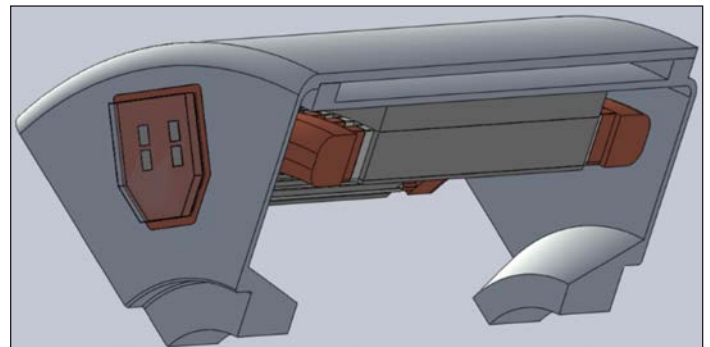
Axially integrated CAD model based on the BMW i3 traction motor and SiC power devices: one-phase power module with one-sixth of the motor.
